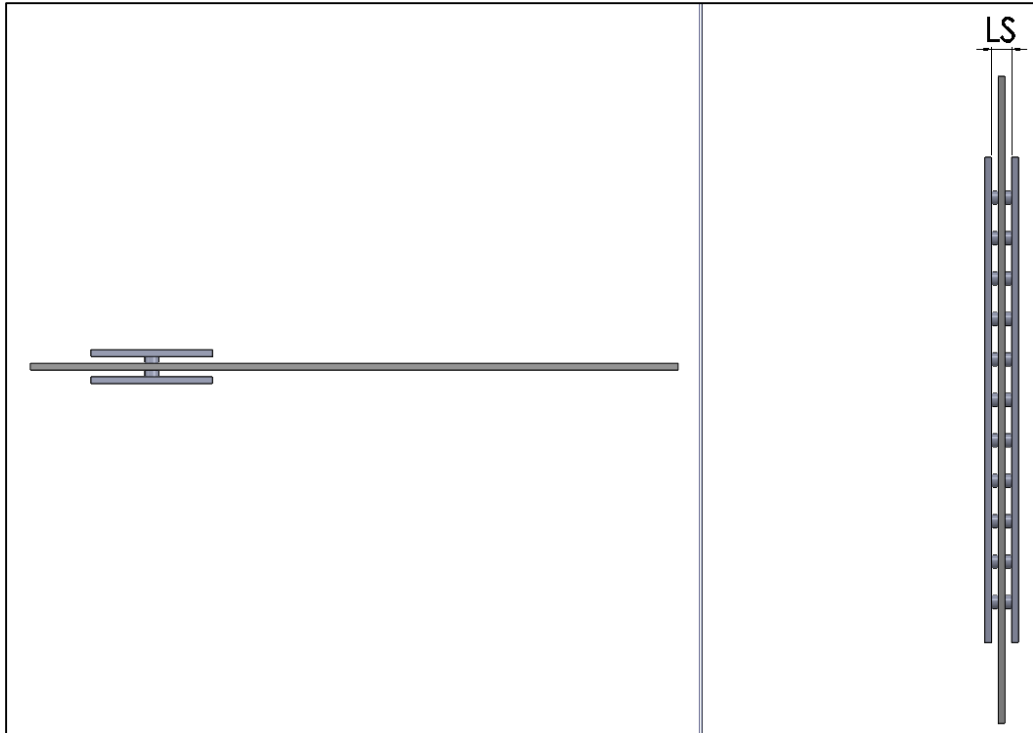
Sandwich panel with one column scatterers with retaining plates (side views)
